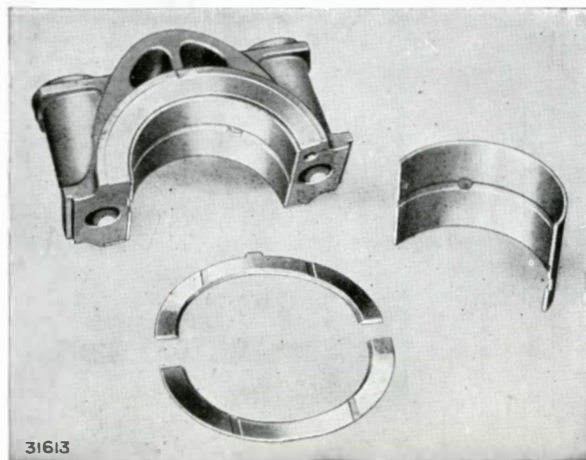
CENTRE MAIN BEARING AND THRUST WASHERS
